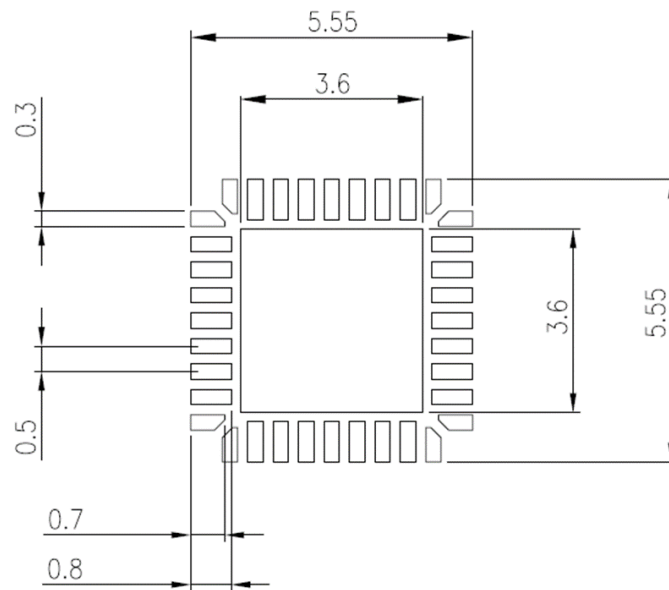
Land pattern dimensions: P-WQFN36-0505-050-001 (for reference only)
